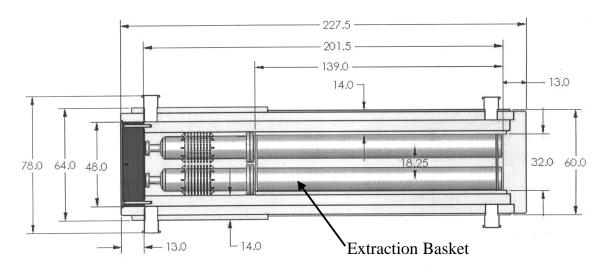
Sectional diagram of the TEF disposal container (dimensions are in inches)
